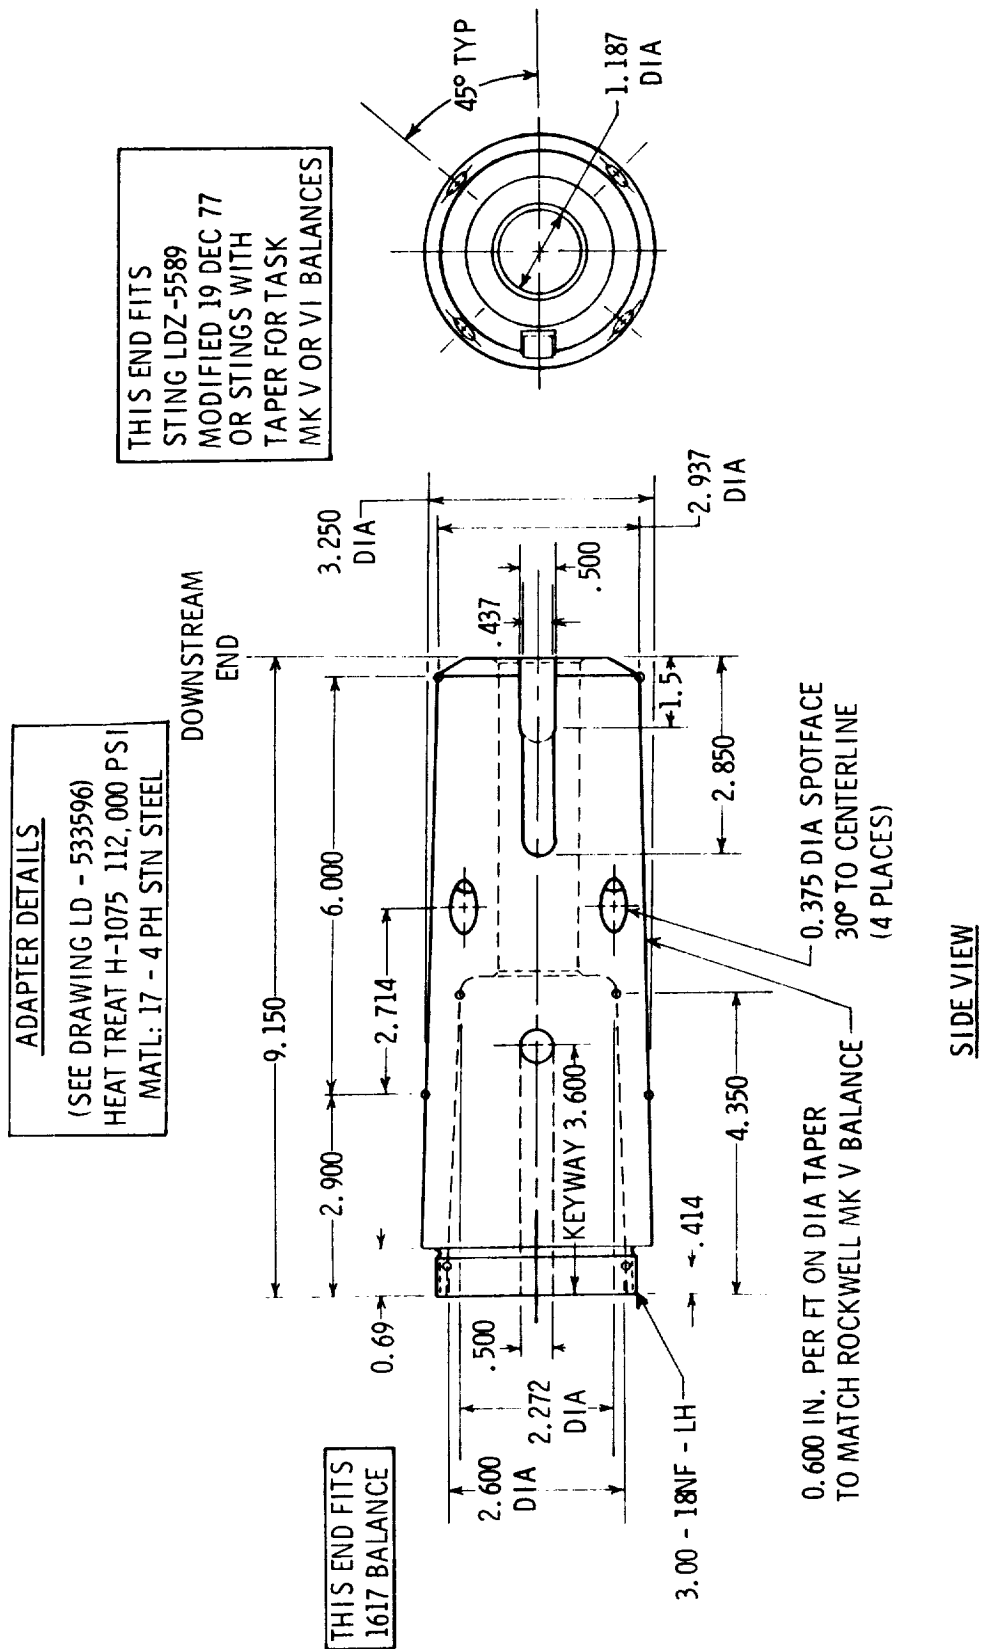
Sketch of balance-to-sting adapter LD-533596. (All dimensions are in inches unless otherwise indicated.)
